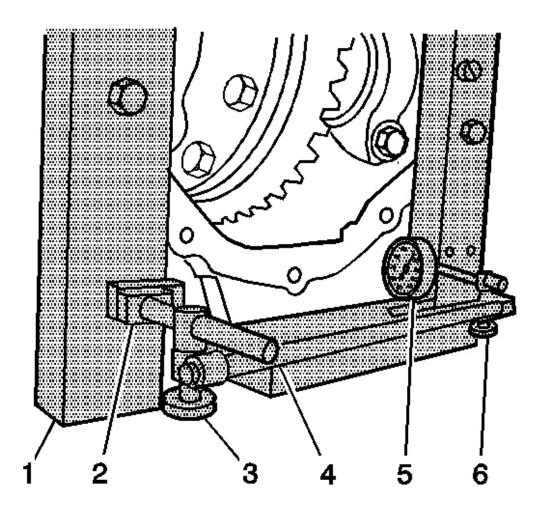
View Of J 8001-1, J 8001-2, J 34178 & J 8001-3 Courtesy of GENERAL MOTORS CORP.
